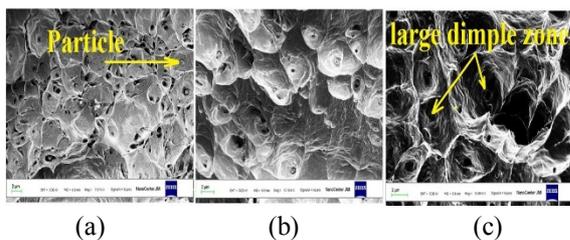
(a), (b) & (c) Fractography of a MIG welded joint after the tensile test at room temperature.
